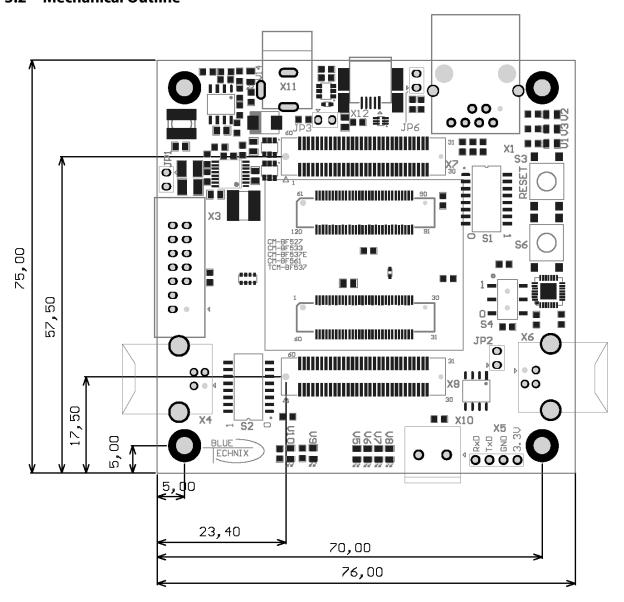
Mechanical Outline – Expansion Connector Placement (top view)
